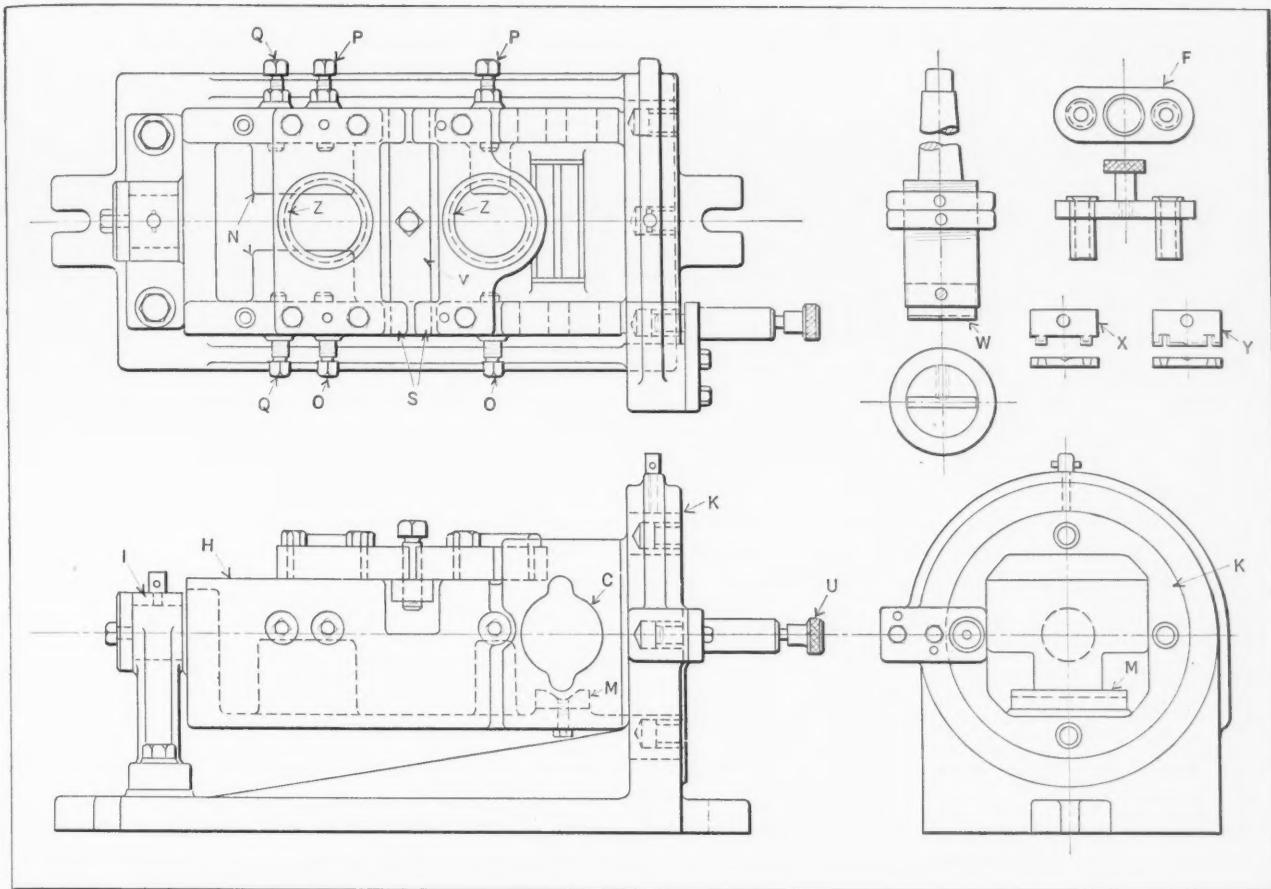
Details of Fixture Shown in Fig. 1, and Tools Used in Machining Part Shown in Fig. 2
